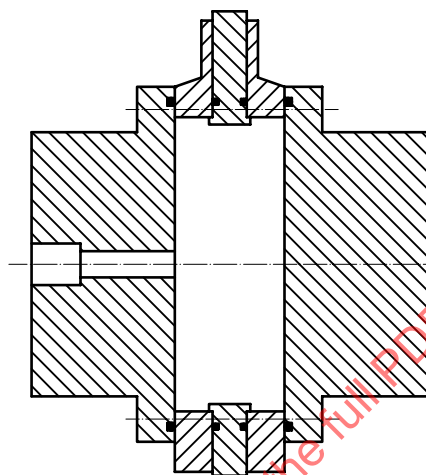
Example of a pressure-tight device for a butterfly valve body
